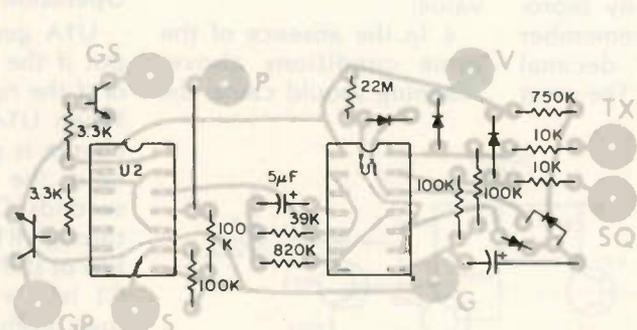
Parts placement for synthesizer scanning adapter (foil side view).
